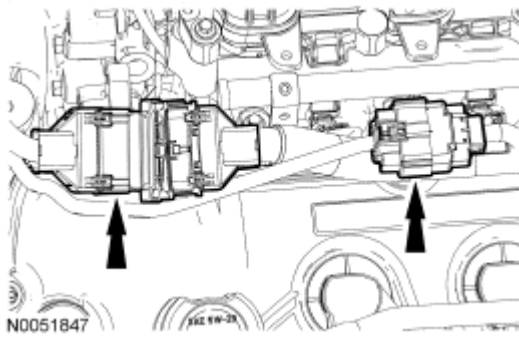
Identifying Engine Wiring Harness Electrical Connectors
